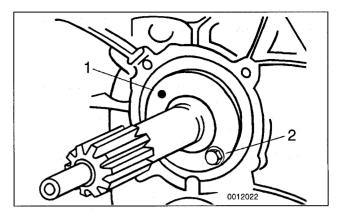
Indent at oil seal housing (1). Punch holes in seal housing at indents and use sheet metal screw (2) to pull seal from transmission.
